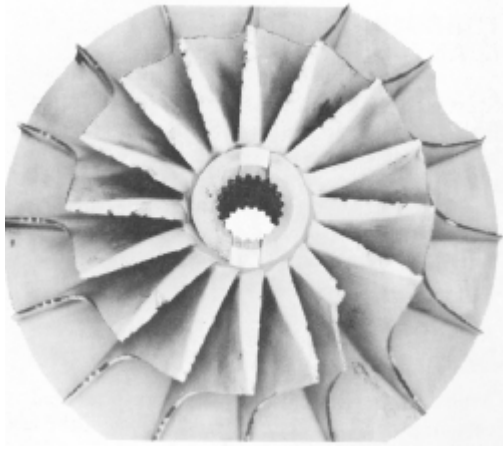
Impeller Damaged By Foreign Material
